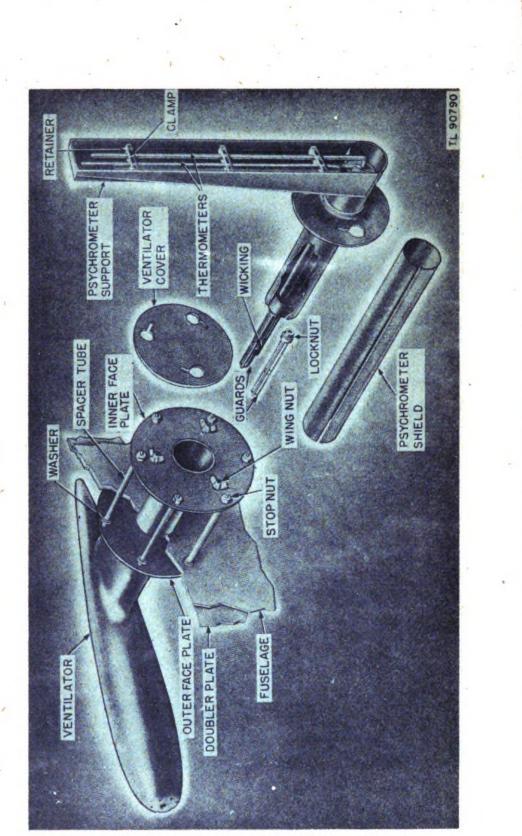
, Psychrometer Equipment ML-313/AM, exploded view.
